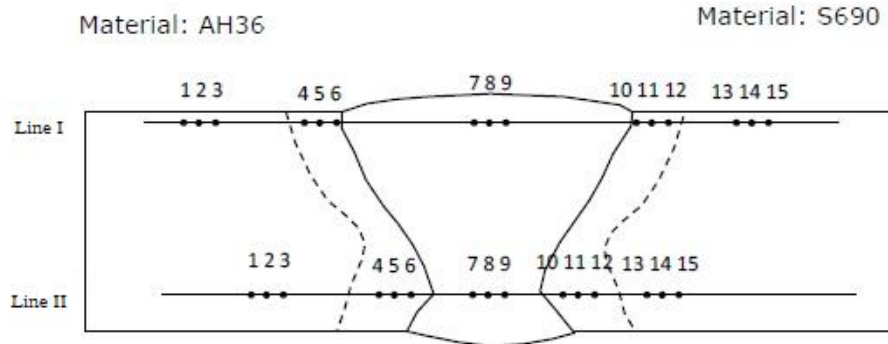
Hardness measurements sketch on AH36-S690 weldment.[53]
